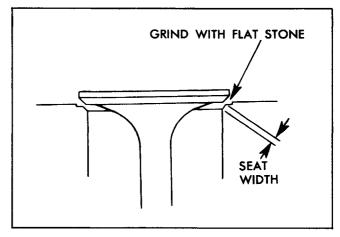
Valve Seat After Grinding with Flat Stone
